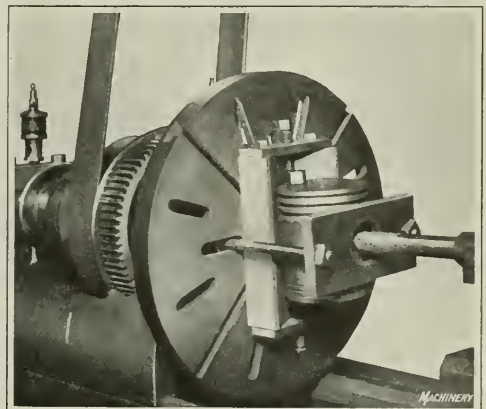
Method of holding a Piston while boring the Wrist-pin Hole
